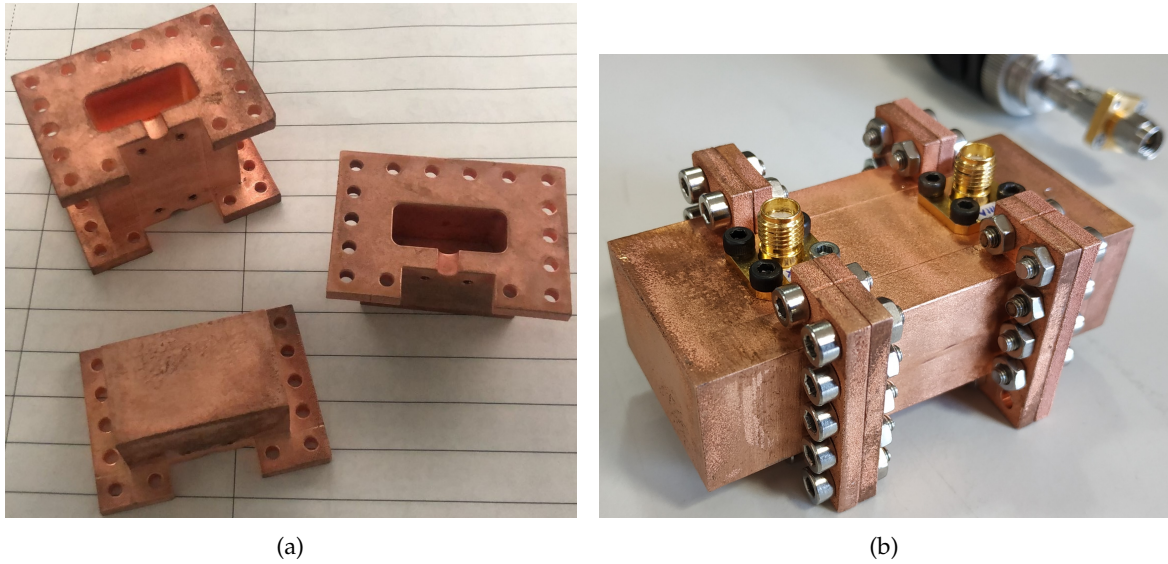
Aspect of the 2cav-Cap prototype after the Cu coating process: (a) modules disassembled, and (b) assembled.
